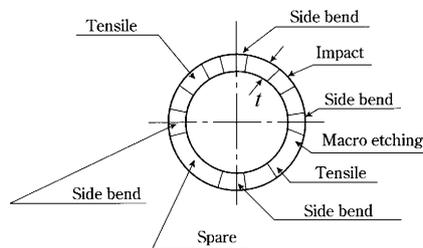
Welding Procedure Qualification Test assemblies (Unit: mm)
